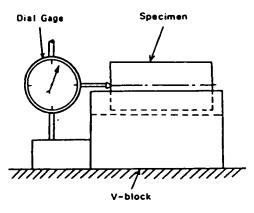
Assembly for Determining the Perpendicularity of End Surfaces to the Specimen Axis
